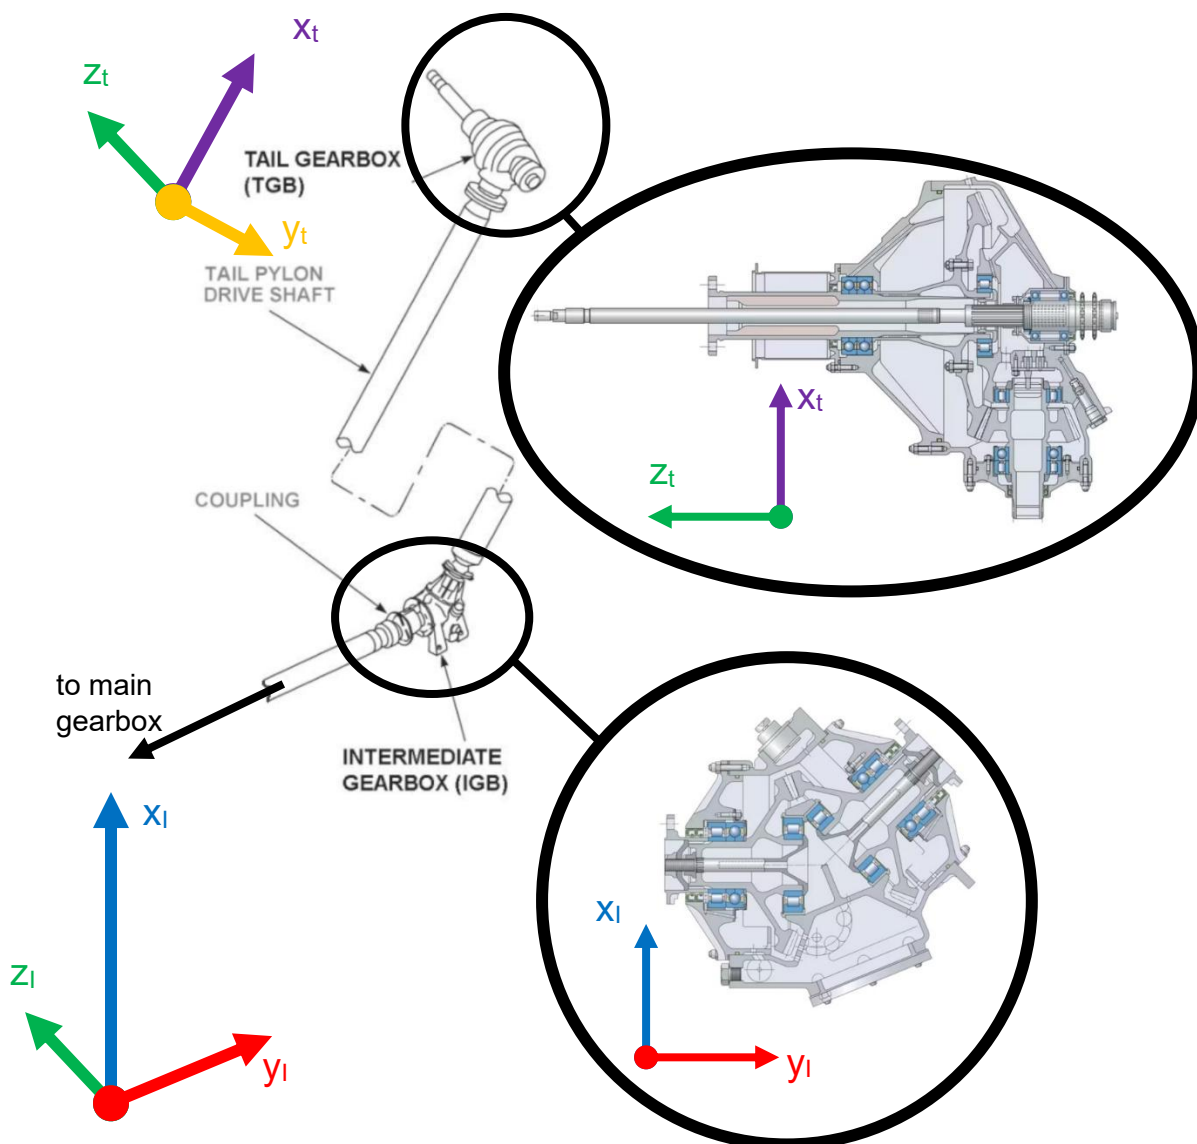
connection of intermediate gearbox and tail rotor gearbox [22][27][28]
